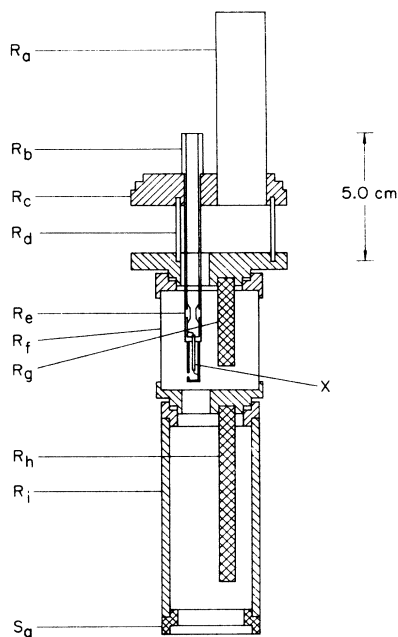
Refrigerator assembly seen in cross section. (R_a) pump-out tube drawn with length greatly compressed; (R_b) needle valve drawn with threading and male piece omitted for clarity; (R_c) flange for attachment to bottom of helium Dewar; (R_d) radiation baffle piece; (R_e) valve seat; (R_f) spacer piece; (R_g) upper thermal post; (R_h) lower thermal post; (R_i) reservoir piece; (S_g) female flange for attachment of sample chamber; (X) impedance tube. The three pieces (baffle, spacer, and reservoir) are tubular with rectangular flanges for indium O-ring seals; the four screws on each flange are not seen in cross section. All material is gold-plated copper except the stainless-steel valve seat, the pump-out tube, and the spacer tube. All joints were soft soldered.
